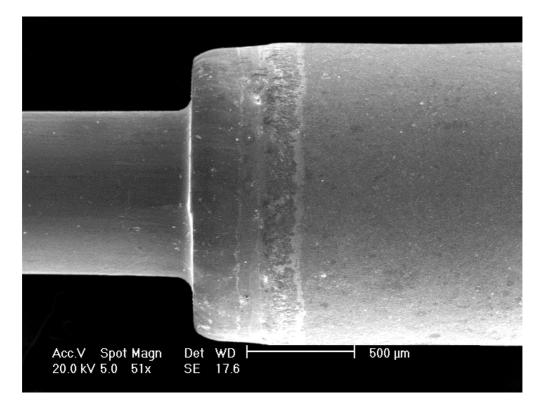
Soldering joint of the Mo pin and the nailhead wire.
